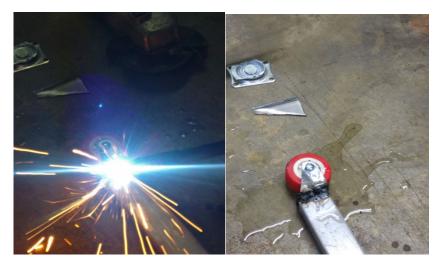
(Installation of Wheels by using MIG welding)
